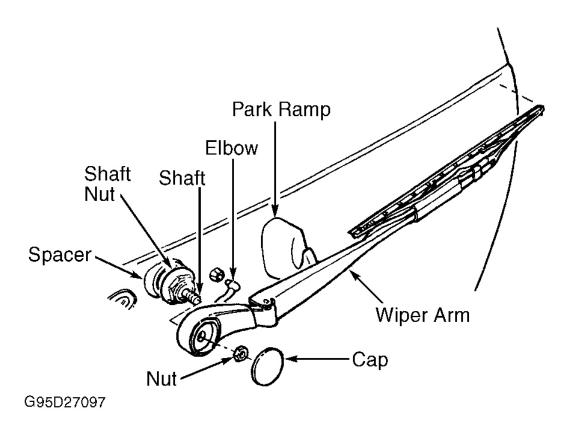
Removing & Installing Rear Wiper Arm Courtesy of GENERAL MOTORS CORP.
